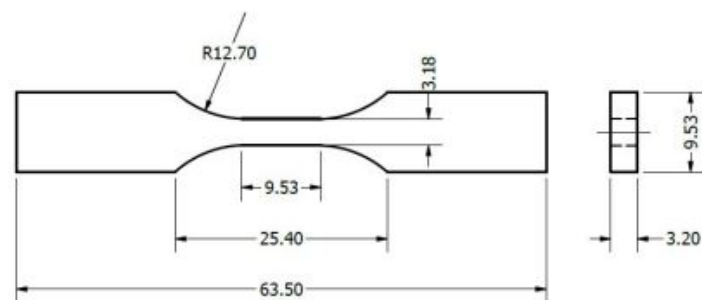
Geometry and dimensions of the specimen for tensile testing.
